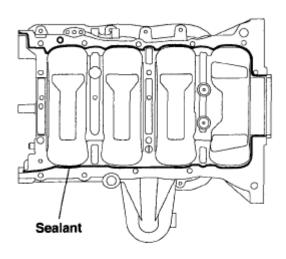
Identifying Ladder Frame With Bolts Courtesy of HYUNDAI MOTOR CO.
